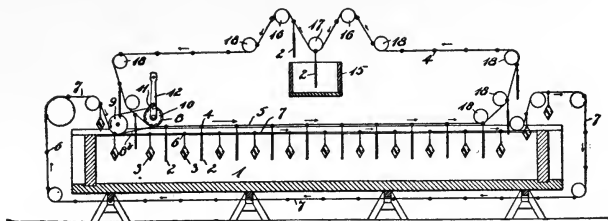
SIDE ELEVATION OF FLEISCHER MACHINE
